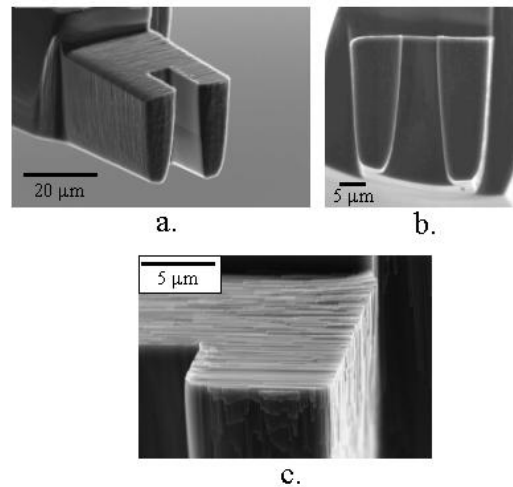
(a) Two tip, single crystal diamond tool shaped by focused ion beam sputtering. (b) End view of the same tool demonstrating relief behind cutting edges. (c) High magnification view of a single tip of this two tip tool.
